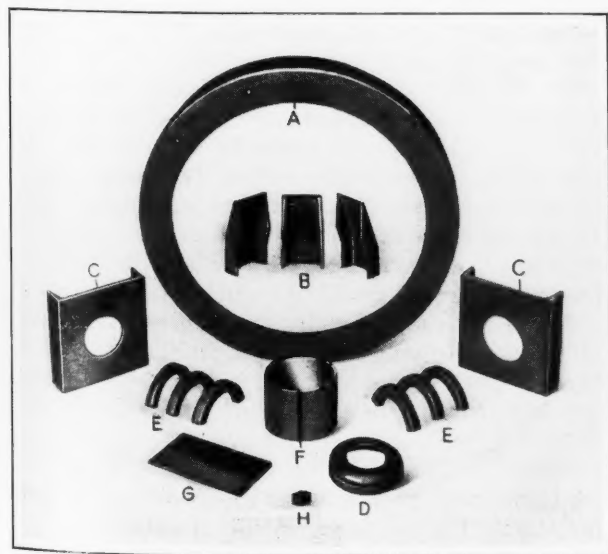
Detail Parts of the Welded End Bracket
